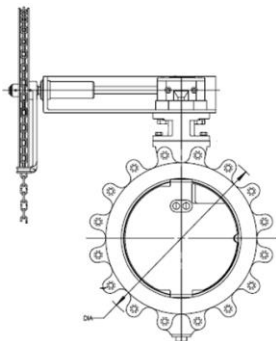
Butterfly Valve, with chainwheel actuator for distant operation
